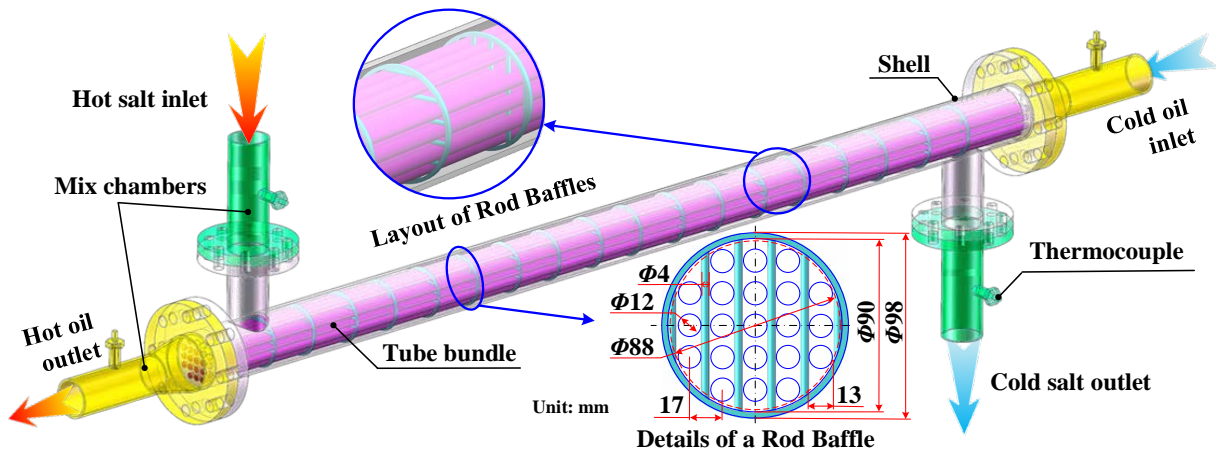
Sketch of the rod baffle shell-and-tube HX showing the detailed layout of the baffle.
